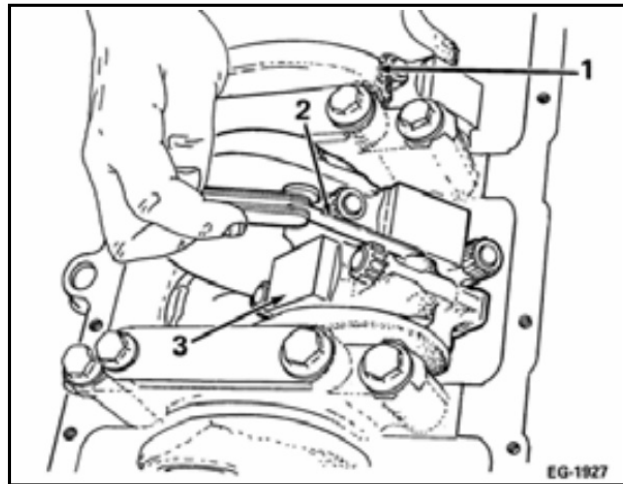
Checking the Connecting Rod Side Clearance with a Feeler Gauge
